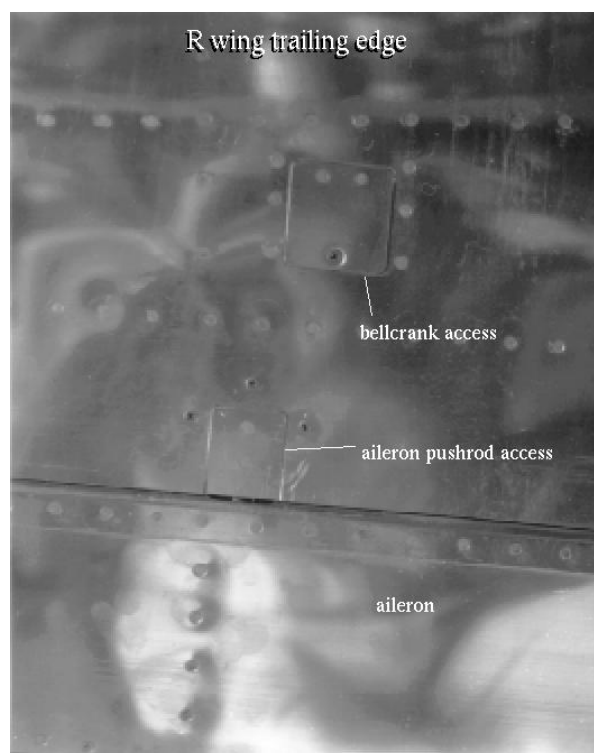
Access plate for the aileron pushrod end. This is not shown in the plans, but practically essential in the assembly. You can cut a similar palte for the center hinge bolt.
